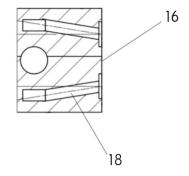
Rear view of the anti-fracture control valve casting
